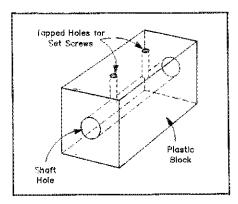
Can't locate a shaft coupler? Make your own out of an acrylic-plastic block. Drill a hole for the shafts through a small block of plastic. Then make two more holes, threaded to take setscrews, that intersect the shaft hole. You can make knobs for odd-sized shafts using much the same approach. chains that allow the plug to be made captive, are available (military number CW-159, available as Amphenoi 31-17 and Kings KC-89-62, for instance), but you can save money and time by making your own.
